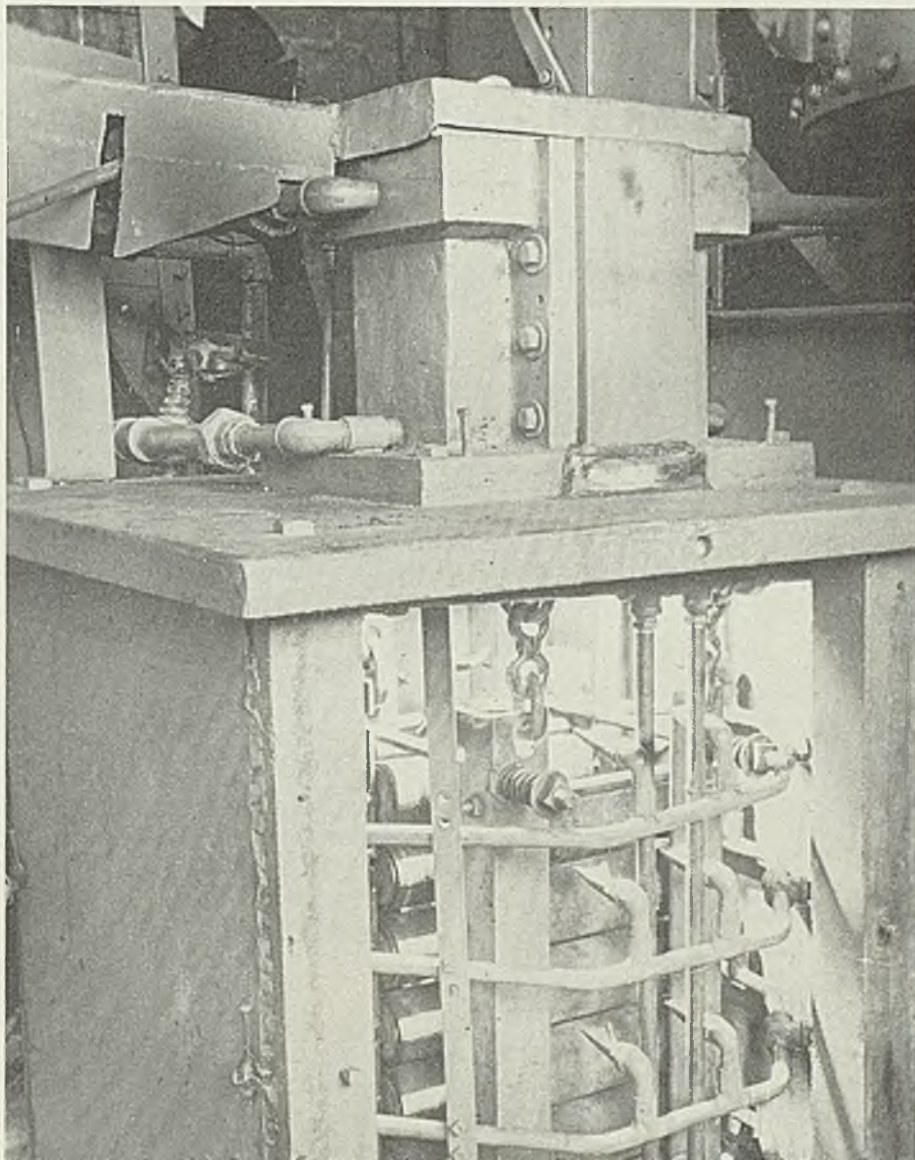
Closeup of mold cavity, in upper center here. Rolls and cooling sprays may be seen in housing immediately below. One side of housing has been removed to show internal arrangement. From here, ingot goes through floor to mechanism in Fig. 3
